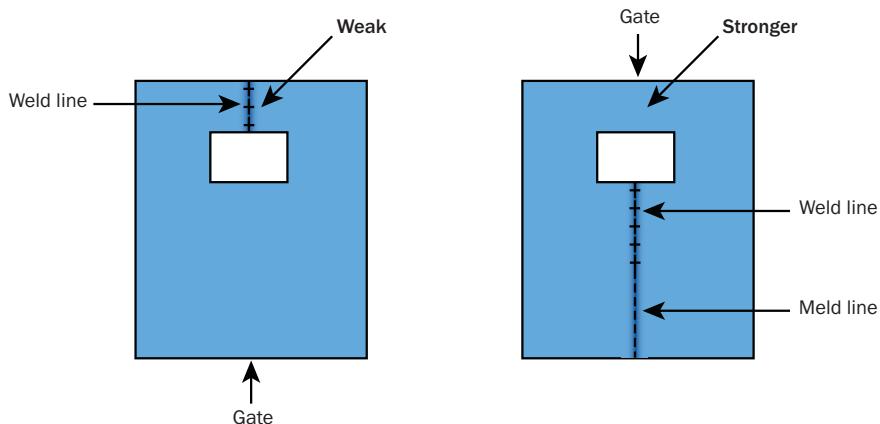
Changing the weld-line position by modifying the gate location
